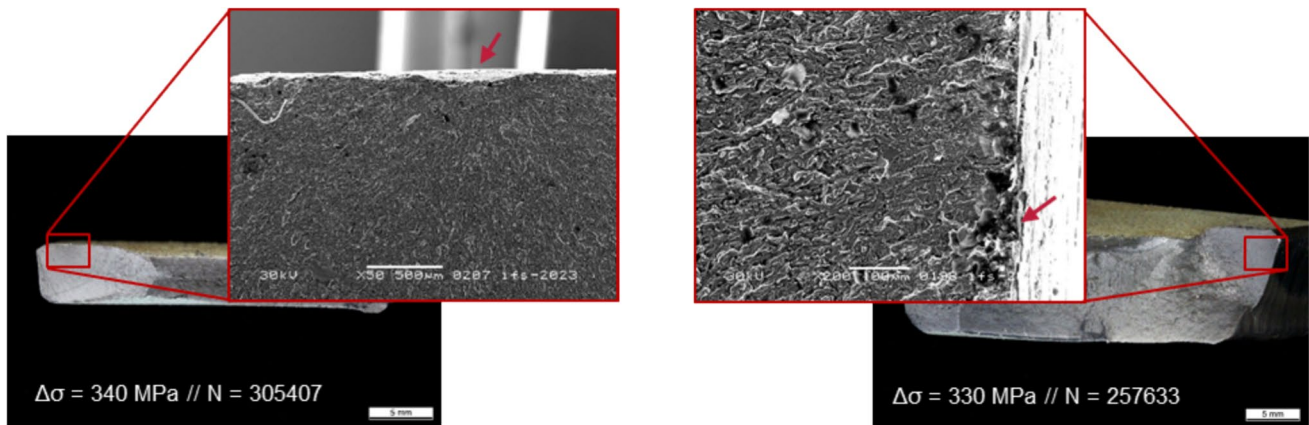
Fracture surfaces of plasma cut S355 material in 5 mm (left) and 12 mm (right), crack initiation at sheet metal surface (left), and cut surface (right)
